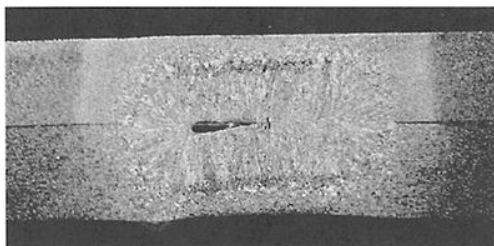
a large void in a mild steel weld [44]
